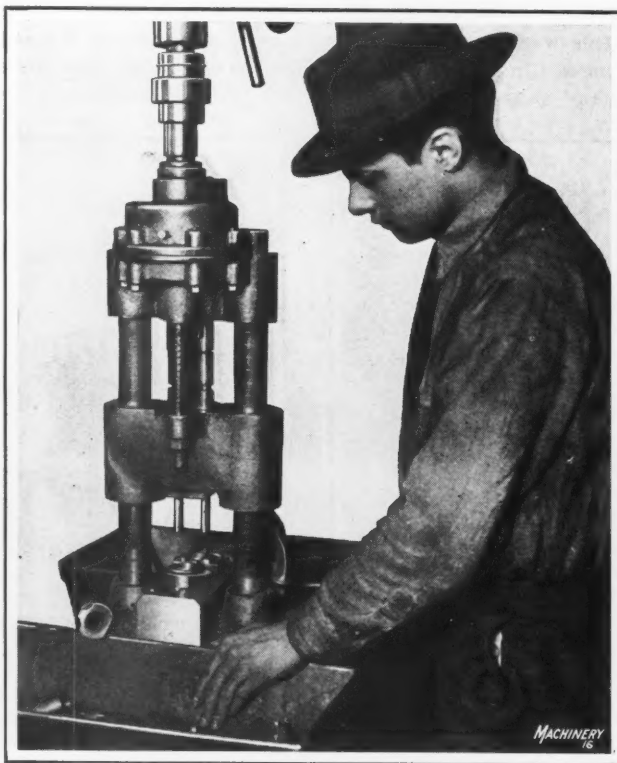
Milling away the Flange of the Tappet Guide at Two Points
